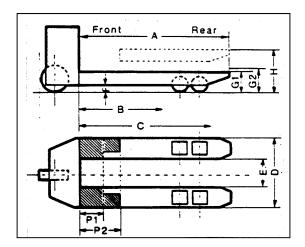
Pallet Truck Single and Double Tandem Wheels
